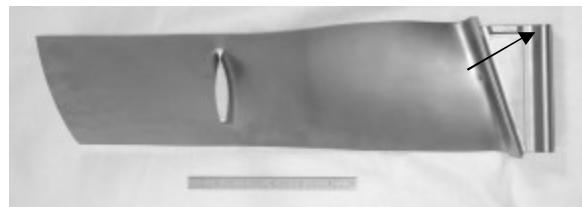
The 1st stage compressor blade (arrow indicates the fretting damage prone dovetail section).
